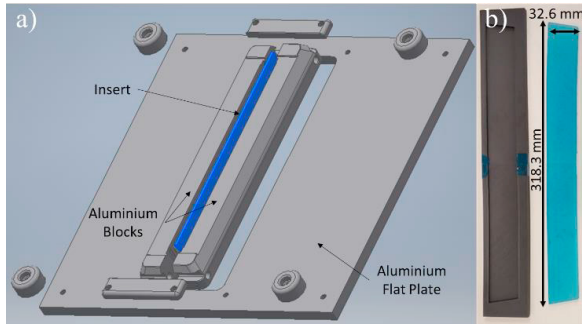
(a) Modular flat plate infusion tool design; (b) 3D printed mould and silicone insert
